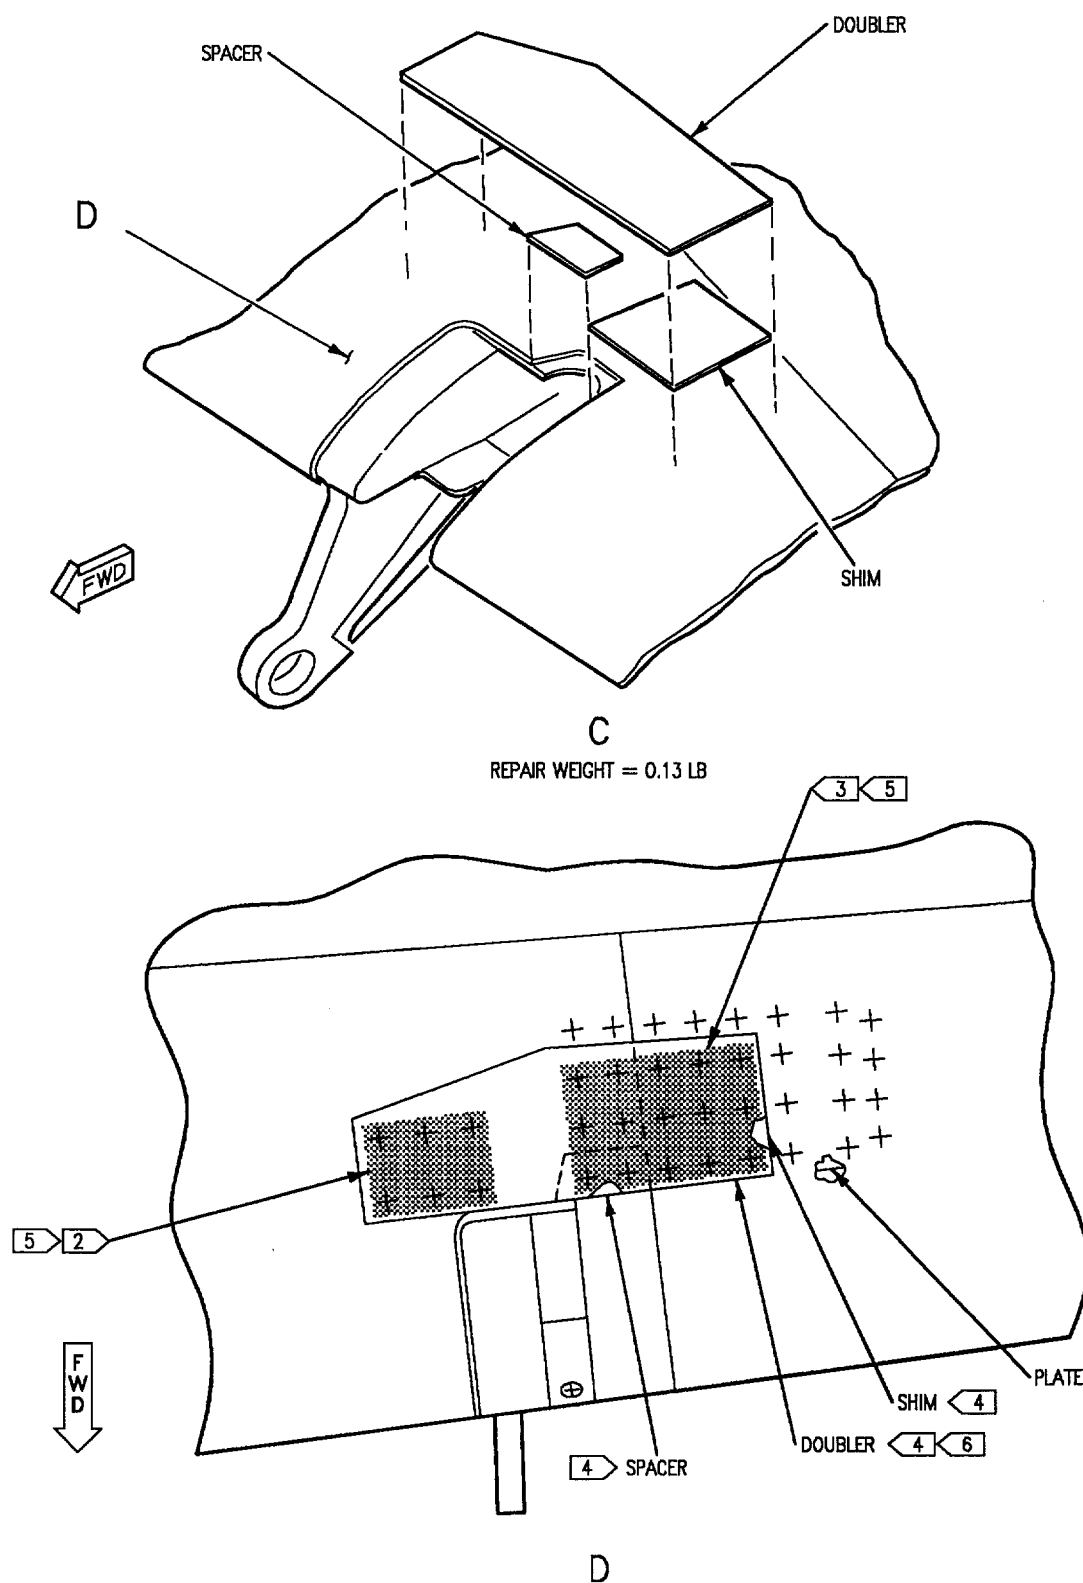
Upper Skin Repair at Outboard Hinge (Sheet 3)
